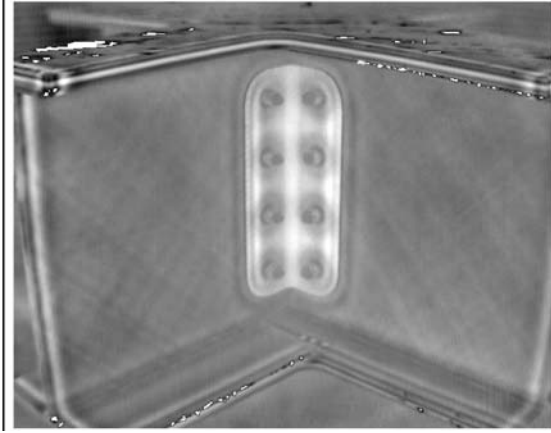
Thermal inspection results for cruciform 1, rivet 3 bottom.
